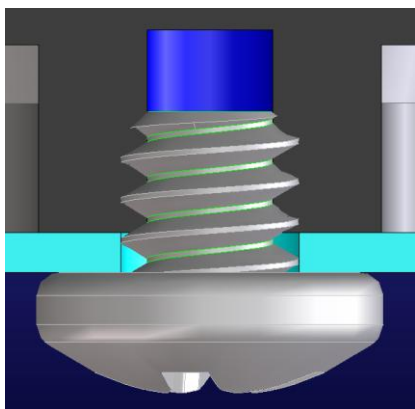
Bottom mount OEM hole, 6-32UNC X 1/8" (2.8 threads engagement)
